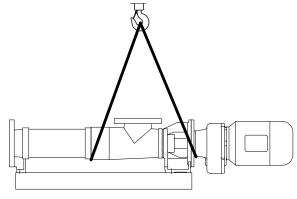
Fastening the lifting gear to the pump unit, close-coupled pump (as illustrated)
